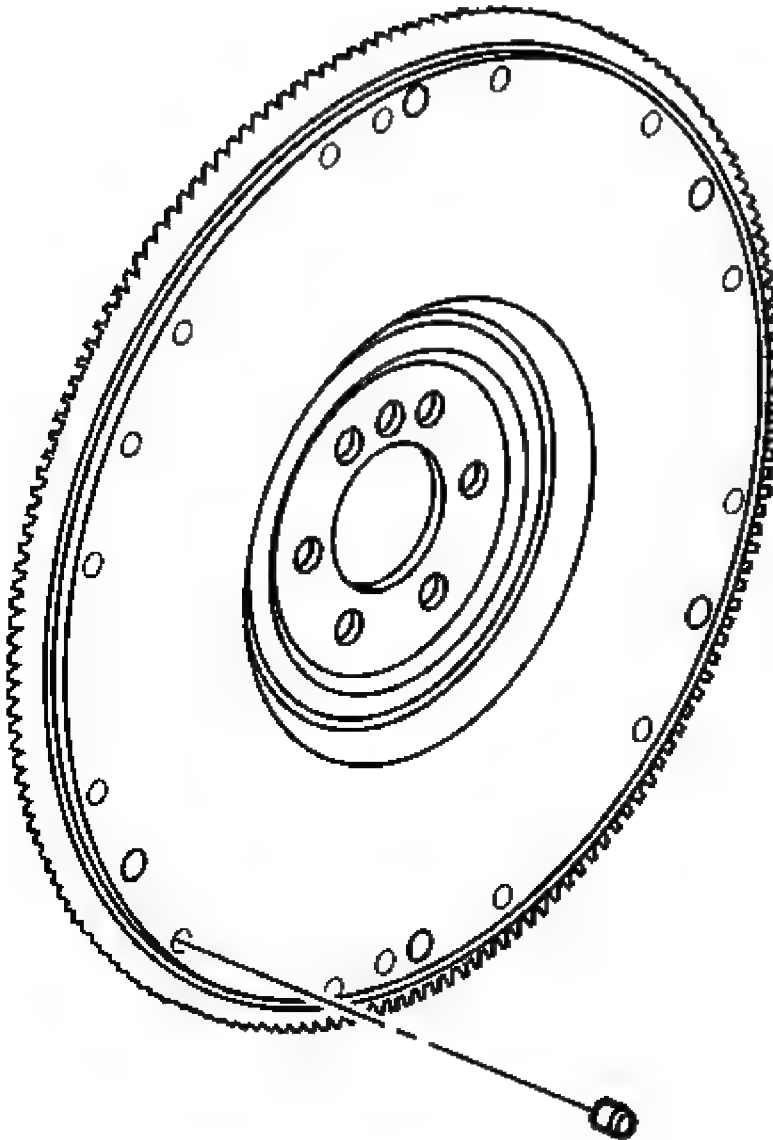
Locating Flywheel Weights (Manual Transmission)
